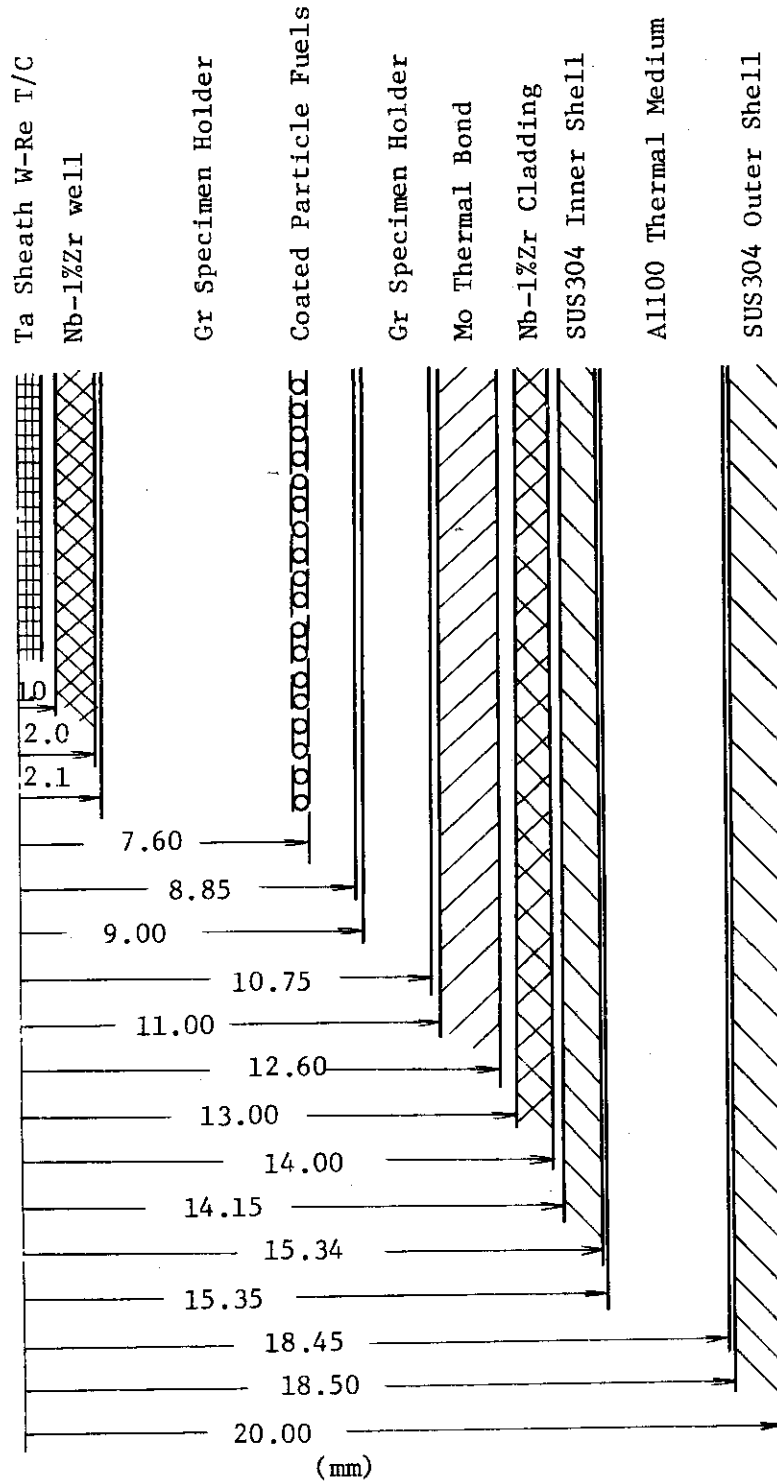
Simplified Cross Section of the Fuel Region of the 72F-7A Capsule Showing the Radii of the Components
